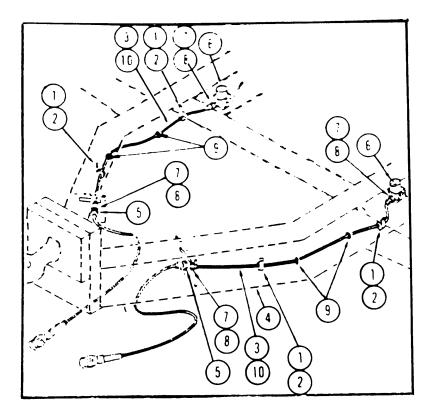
Trailer Air Brake Tubing Sections Between Anchor Couplings and Air Chambers Assemblies (ARMY)
